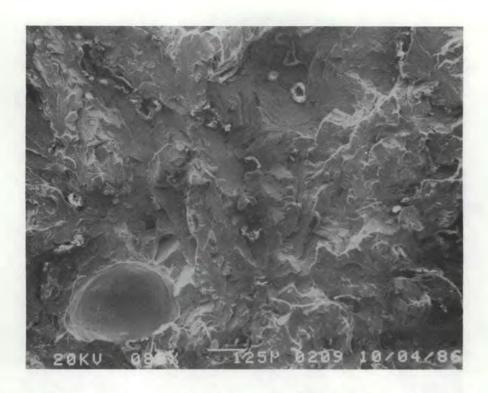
Fractograph of crack initiation point of E7018 weld showing slag, porosity and cleavage fracture (80X)
